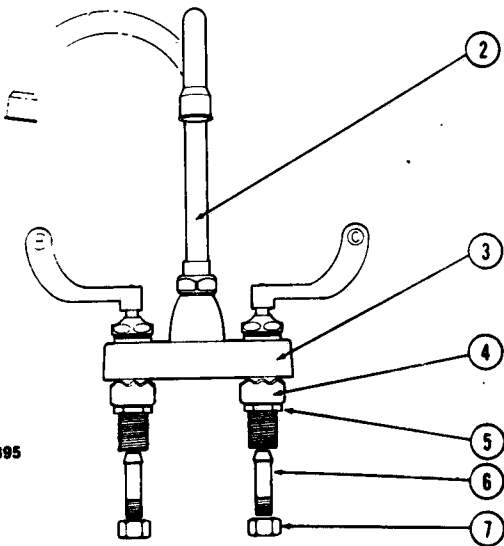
FAUCET ASSEMBLY WITH GOOSENECK SPOUT.
